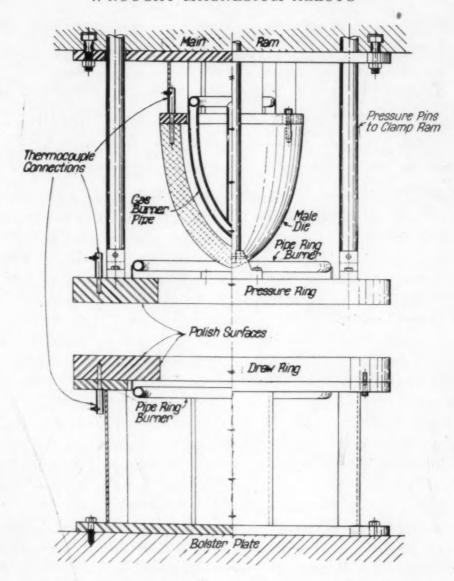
Typical Die for Hot Drawing Magnesium Alloy Sheet.
